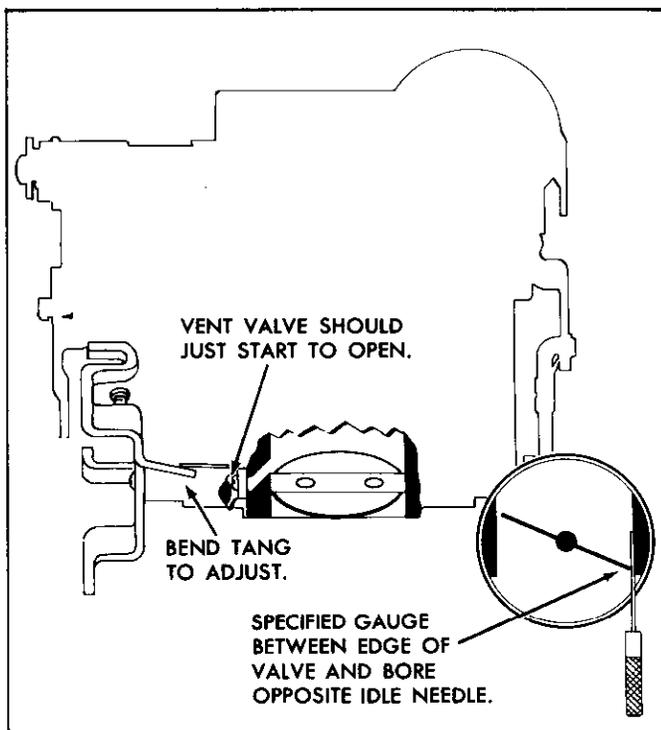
Idle Vent Valve Adjustment (Model HV)
